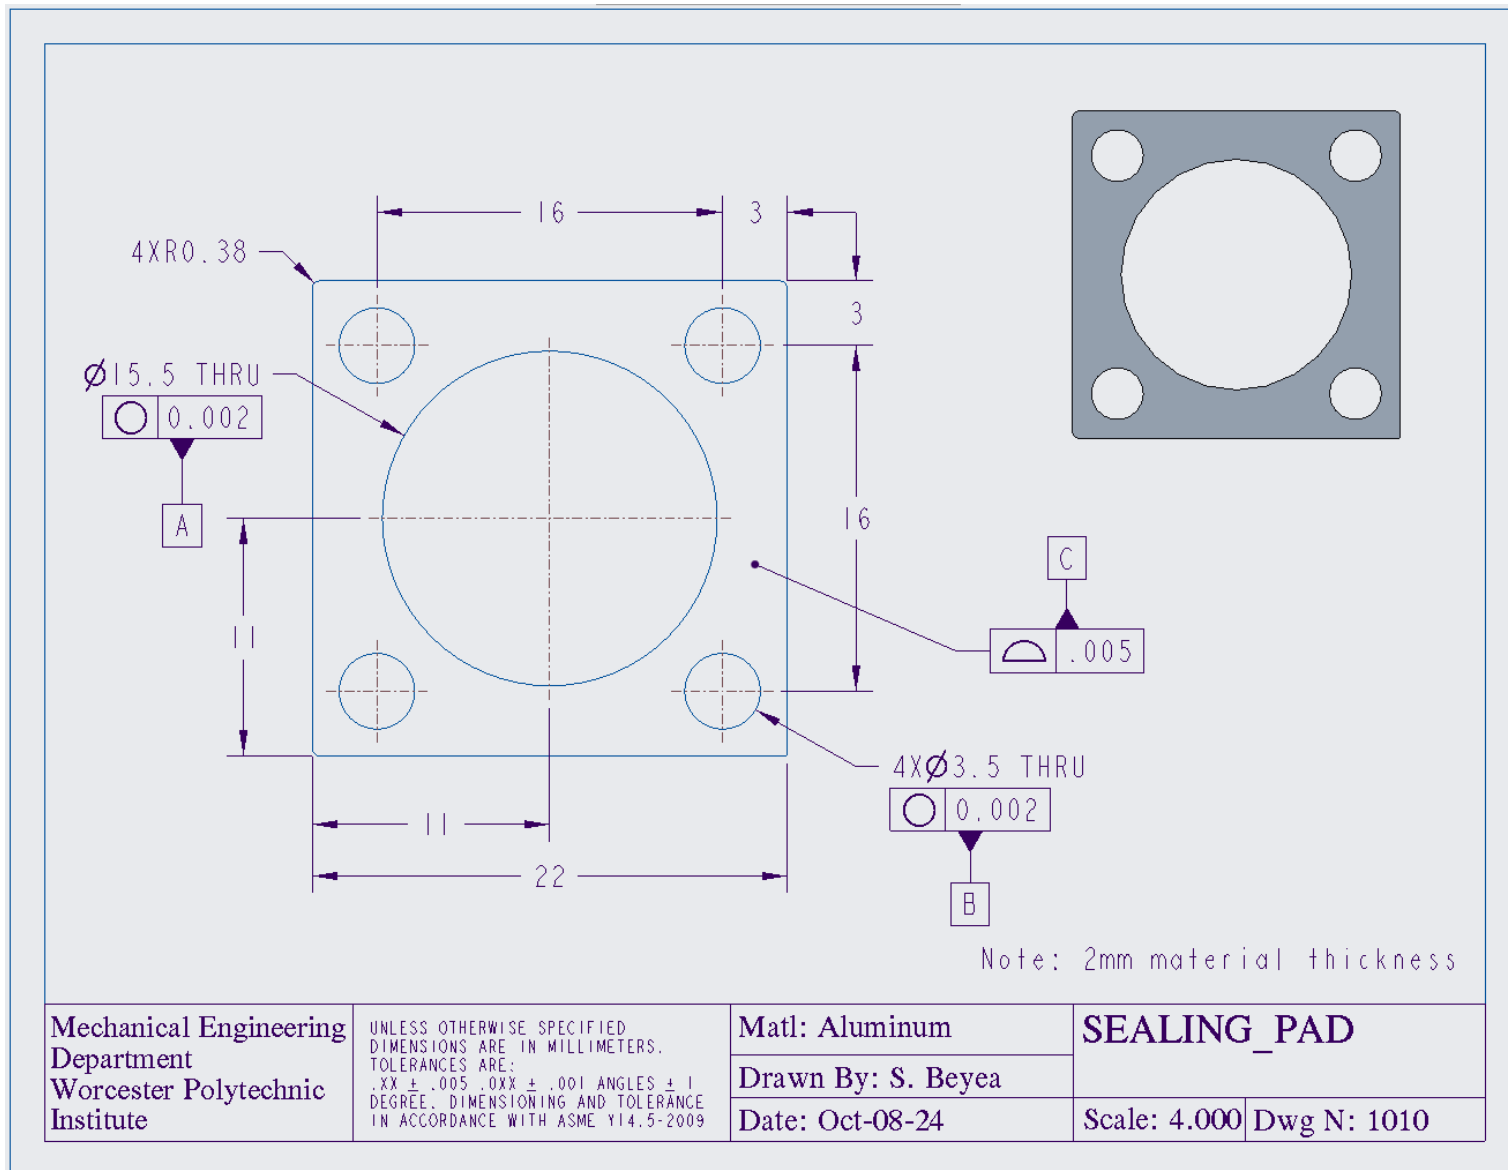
the sealing pad which seals the gas chamber of the heat cylinder.
